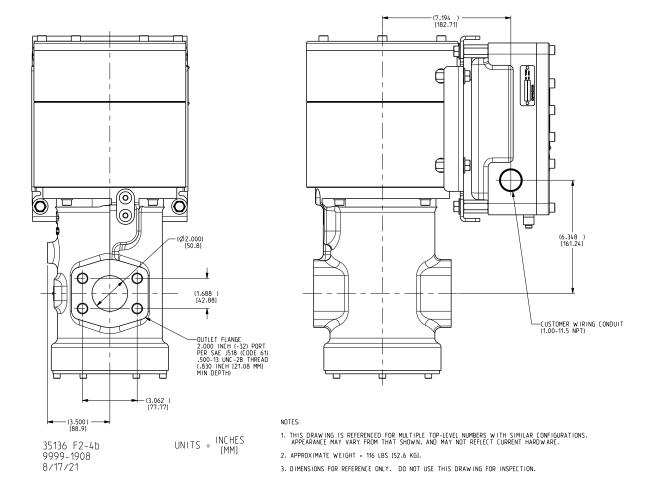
Outline Drawing Aluminum GS50 with Conduit Entries
